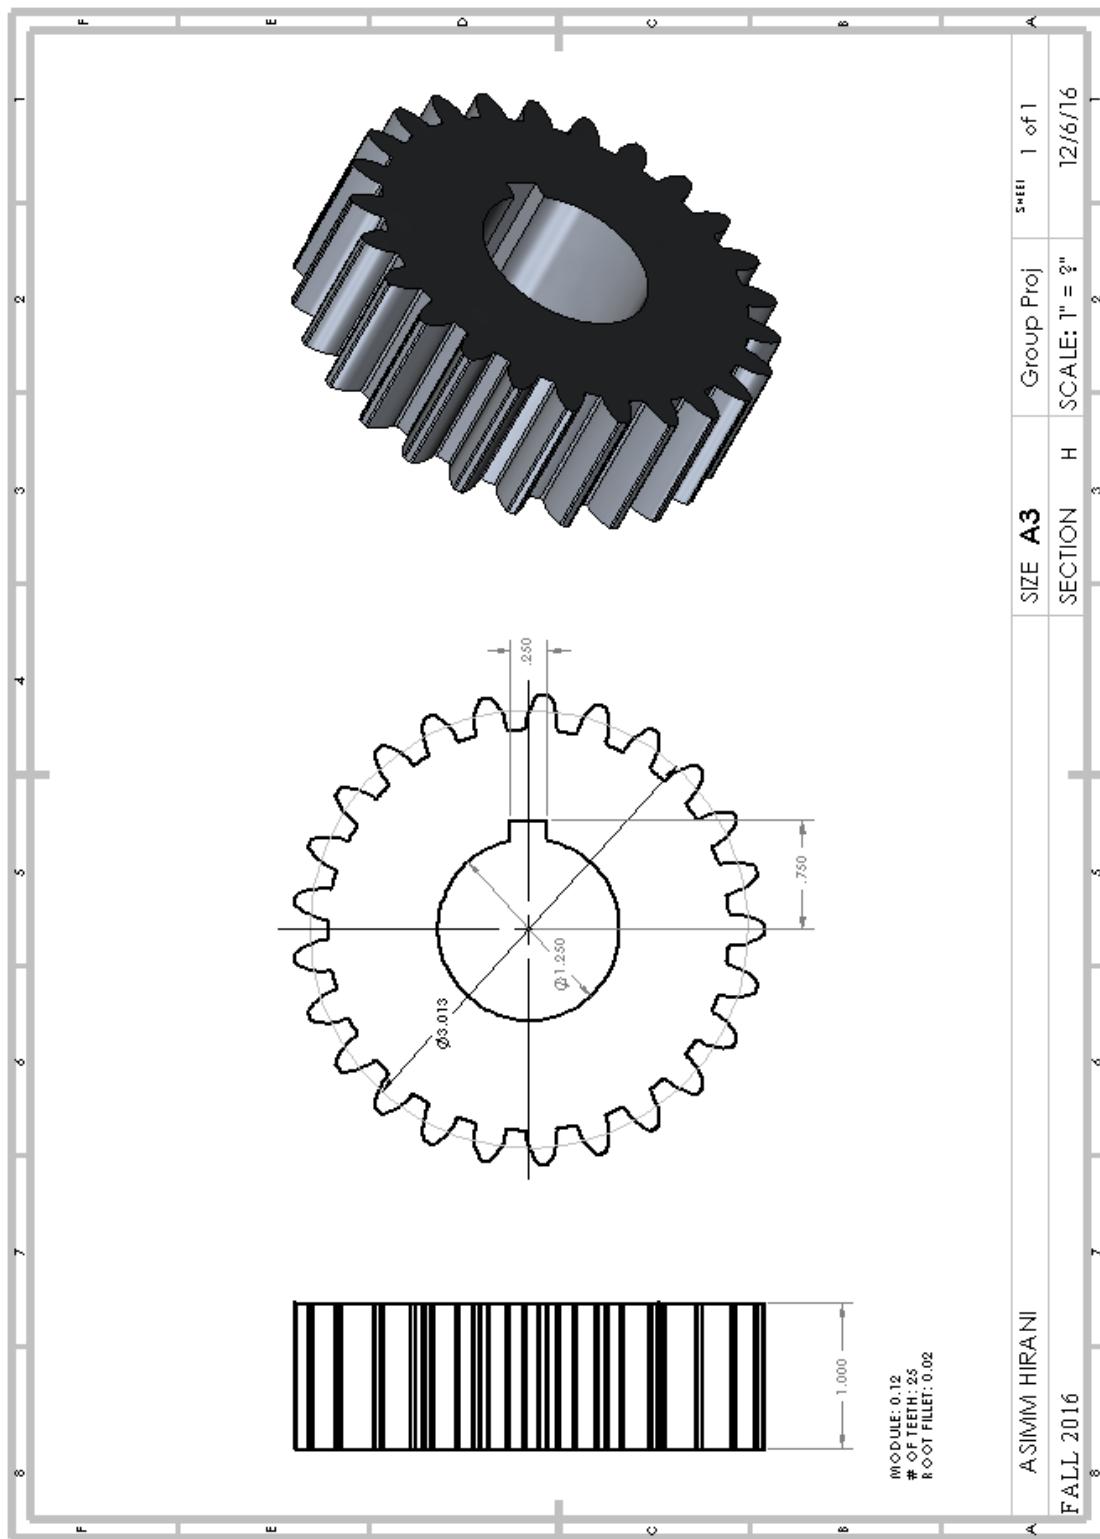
Hirani, Asimm: 25 Tooth Gear
